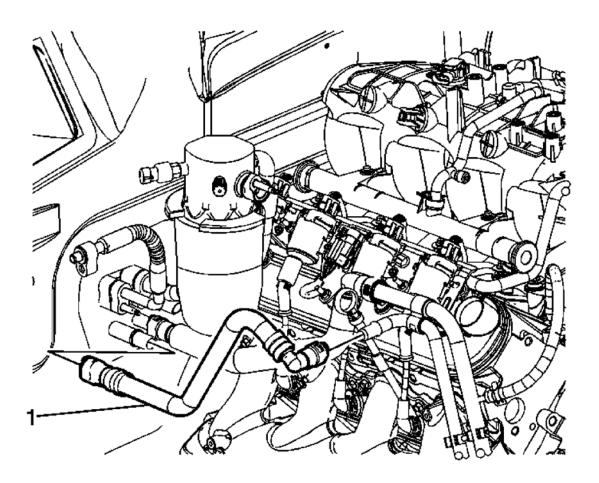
Identifying Heater Inlet Hose (LH6) Courtesy of GENERAL MOTORS CORP.
